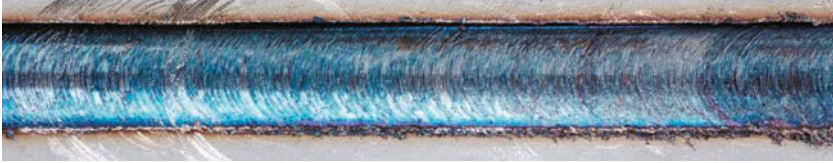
Weld appearance of a FSW on AISI304 (2 mm probe length).
